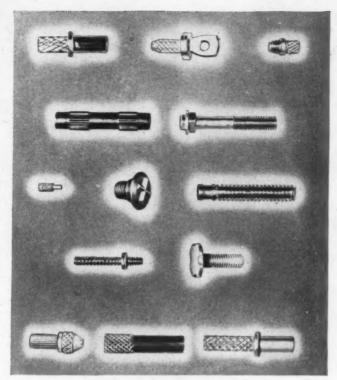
Above—A group of small cold-headed parts finished on flat-die thread-rolling machines
